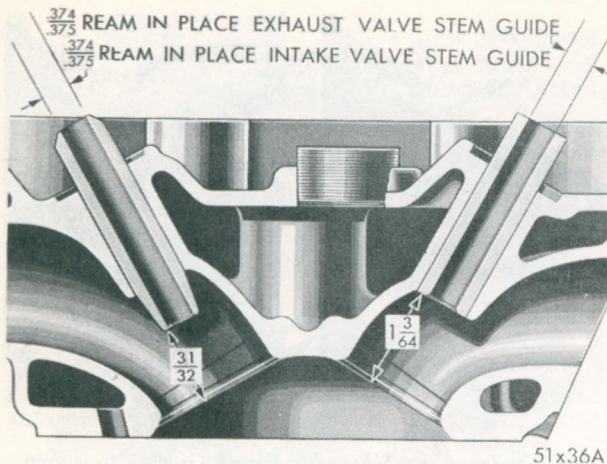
Exhaust and Intake Valve Guide Installed in Head (FirePower)
